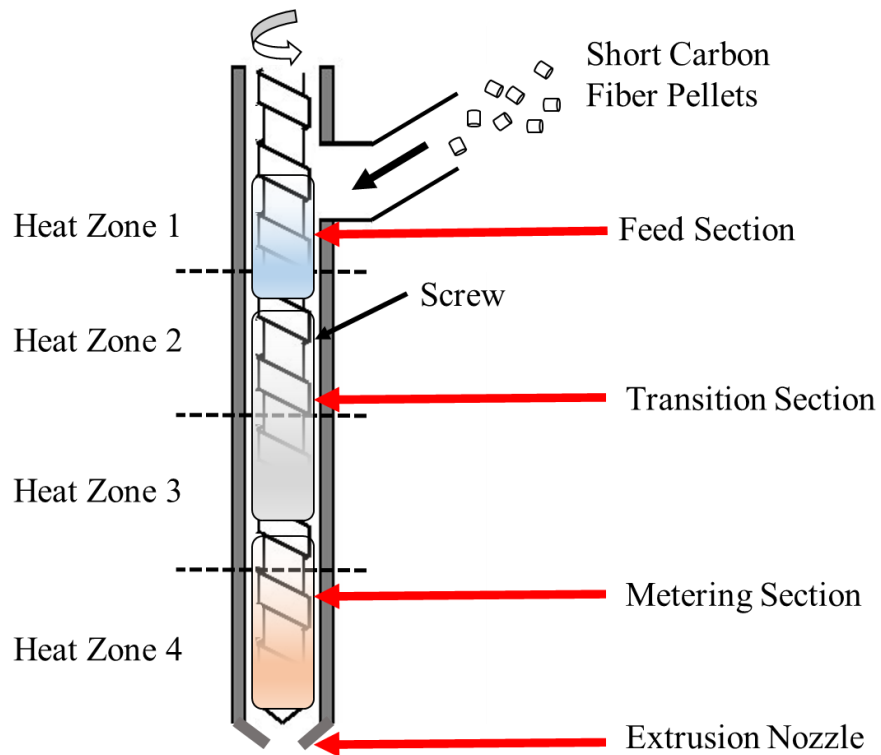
Single screw polymer extrusion deposition head of BAAM [35]. Screw has four heating zones to melt the pellets. Pellets undergoes from different sections as feed, transition and metering before coming out from extruder.
